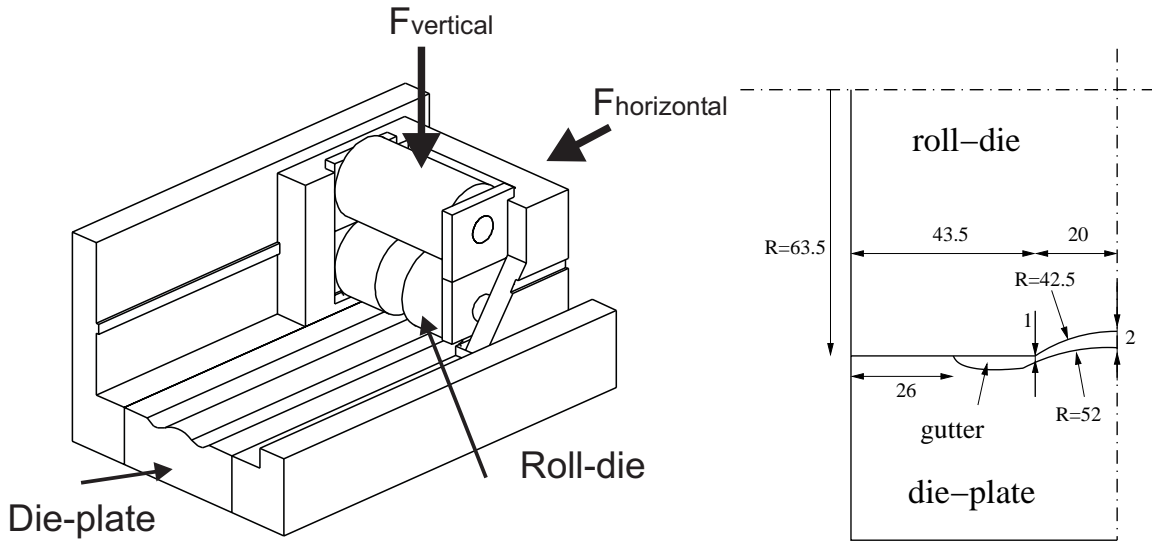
The investigated shape rolling process with tool dimensions [mm]
